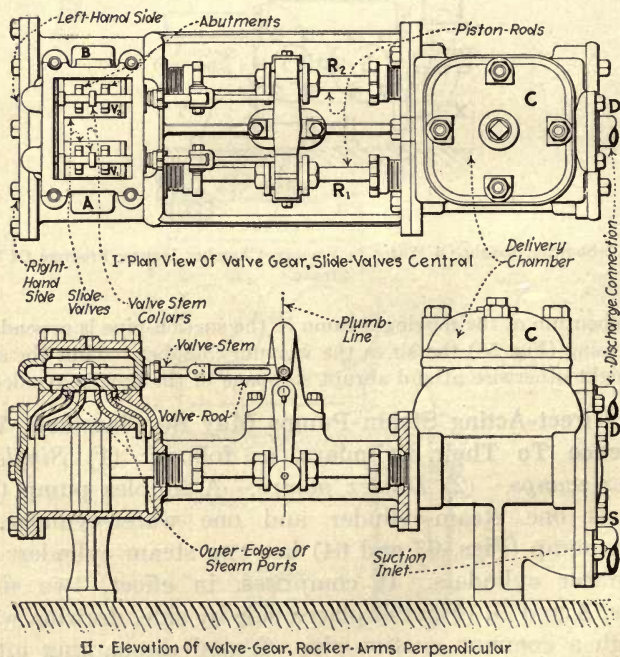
Plan And Elevation Of Valve Gear Of Duplex Steam Pump.
